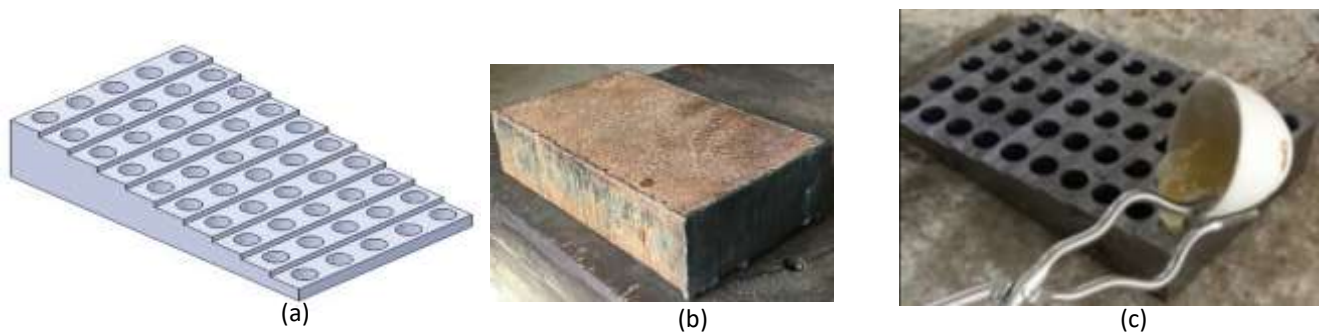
Development of the mould for sample production: (a) CAD model; (b) mild steel blank fed into CNC milling machine; and (c) the produced mould
